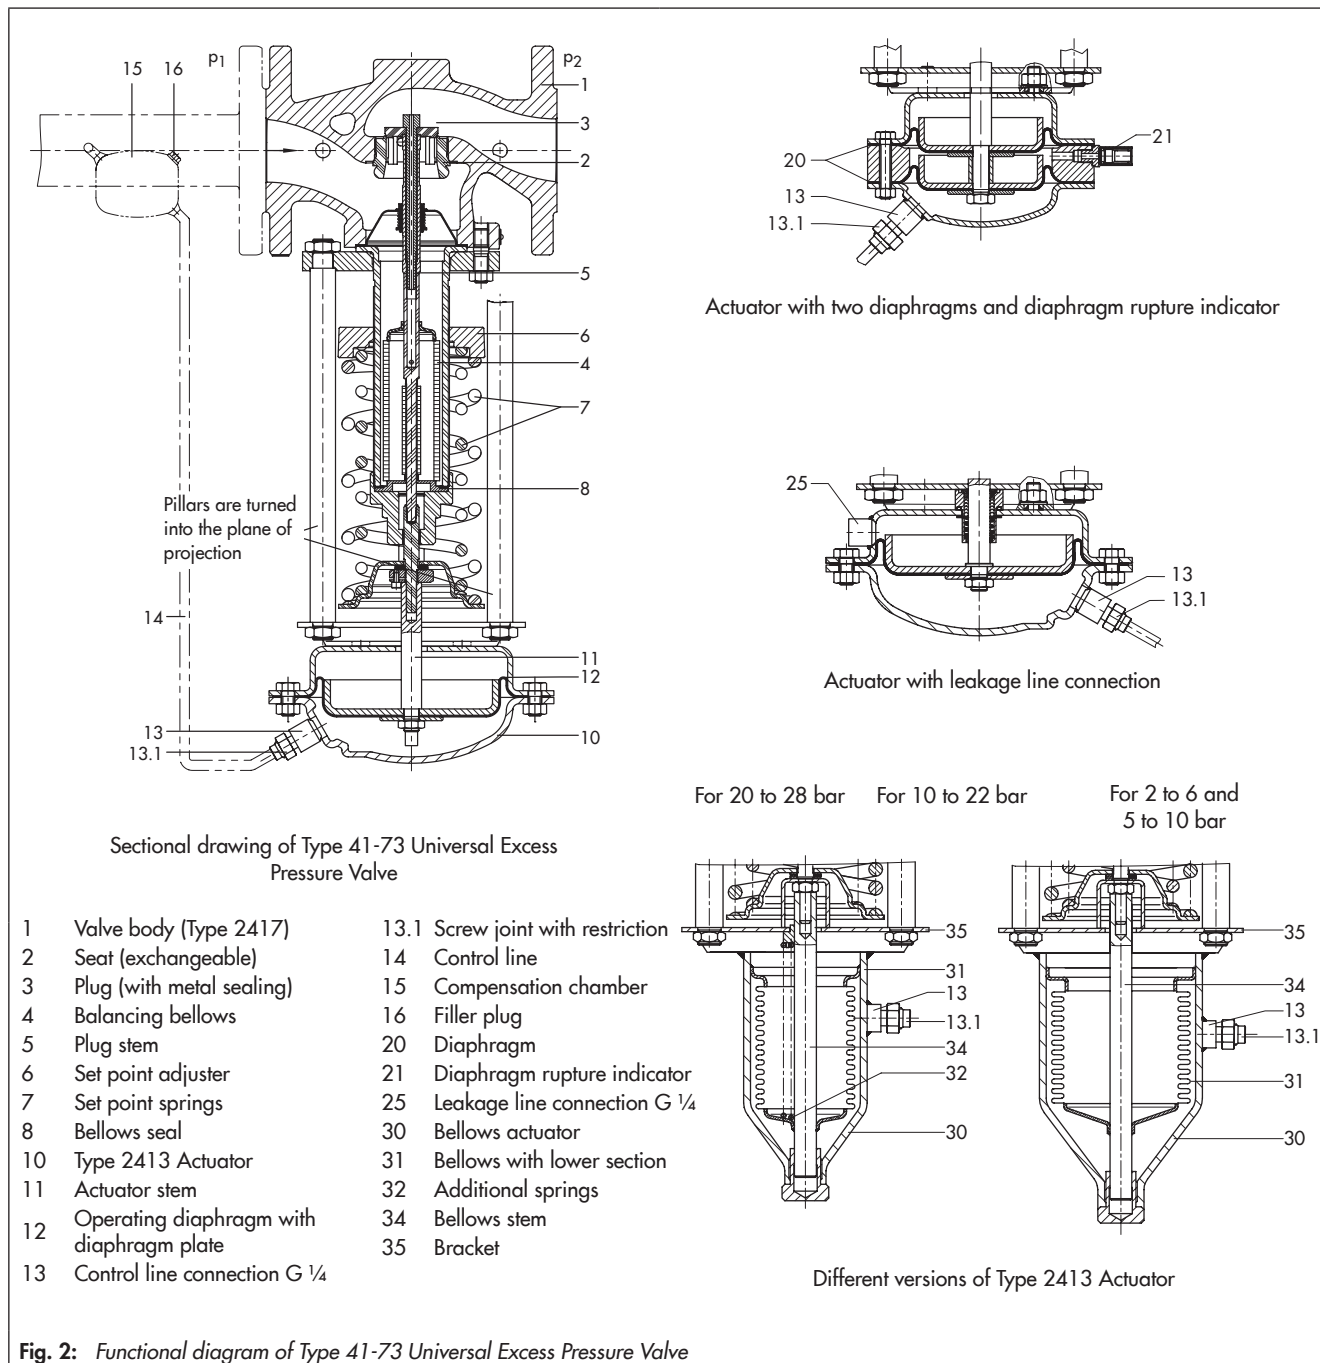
Functional diagram of Type 41-73 Universal Excess Pressure Valve
